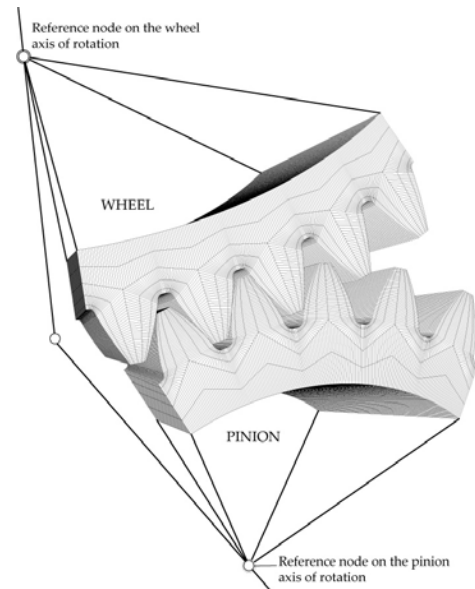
Finite element model of a spherical involute bevel gear with five pairs of contacting teeth
